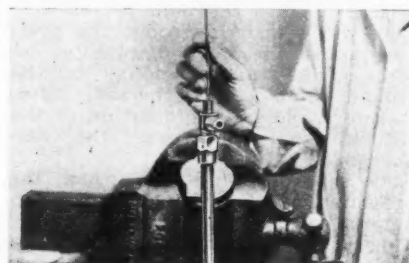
Insert peening rod about 1/4 in. into inner tubing.
